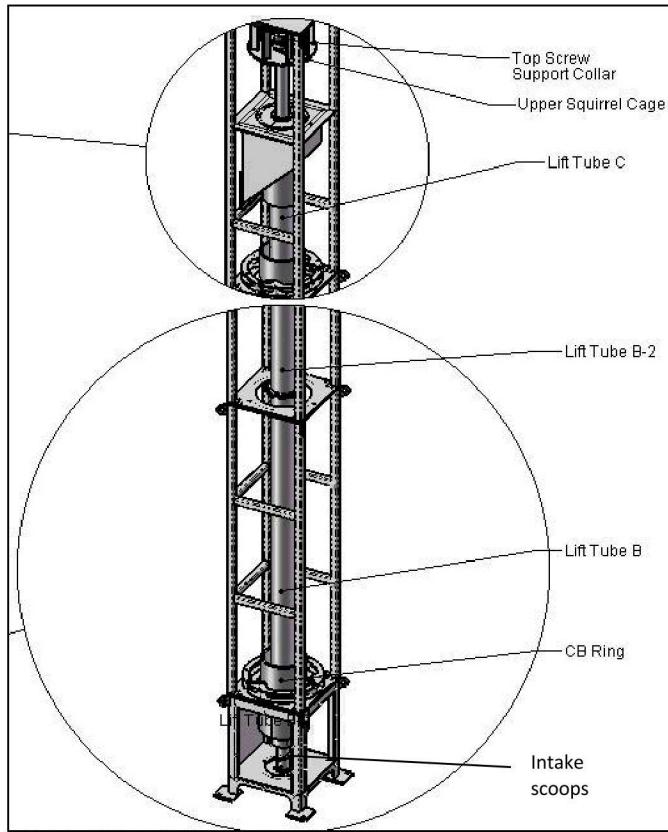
Screw-type elevator CAD representation exposing the internal components of the elevator
